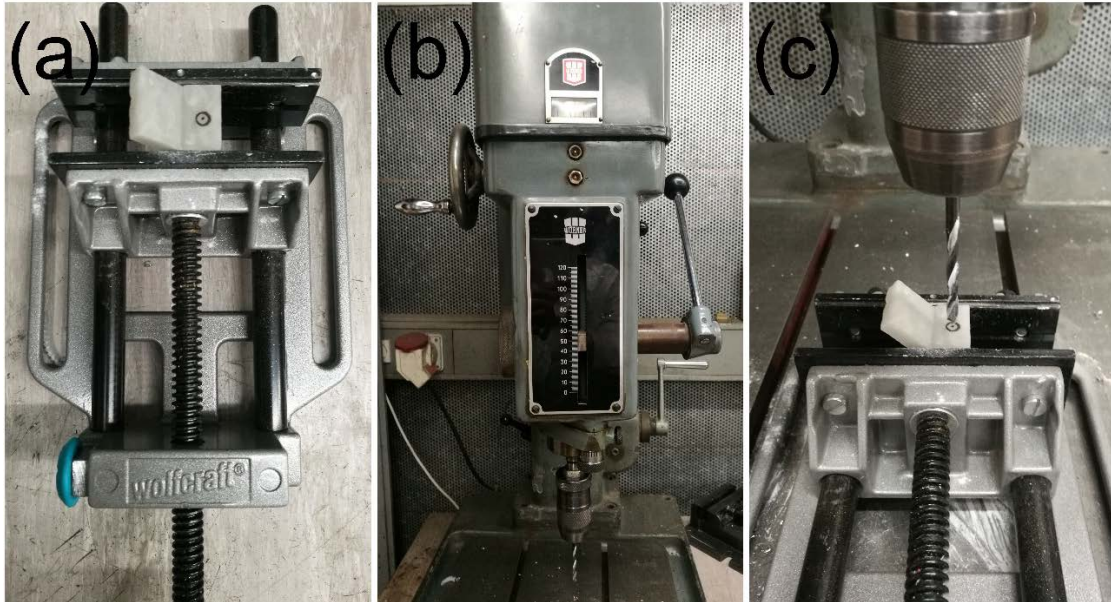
Drilling the centered hole of the reference test block. (a) Reference test block was fixed on a universal vice; (b) The parameter setting of the drilling machine “B 13S”; (c) The centered hole was being drilled.
